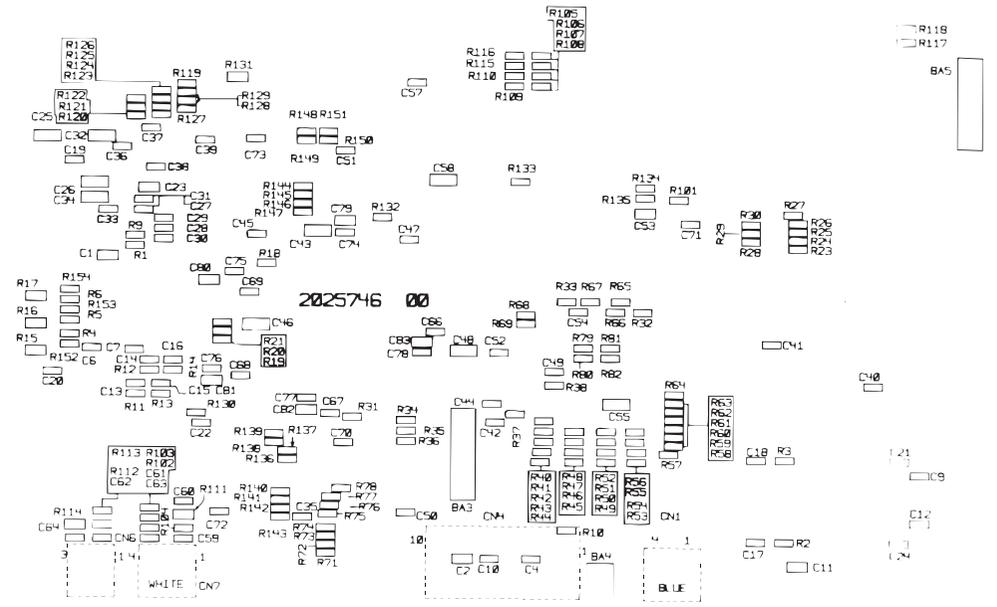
B063MAIN-B Board Component Layout (Soldered Side)
